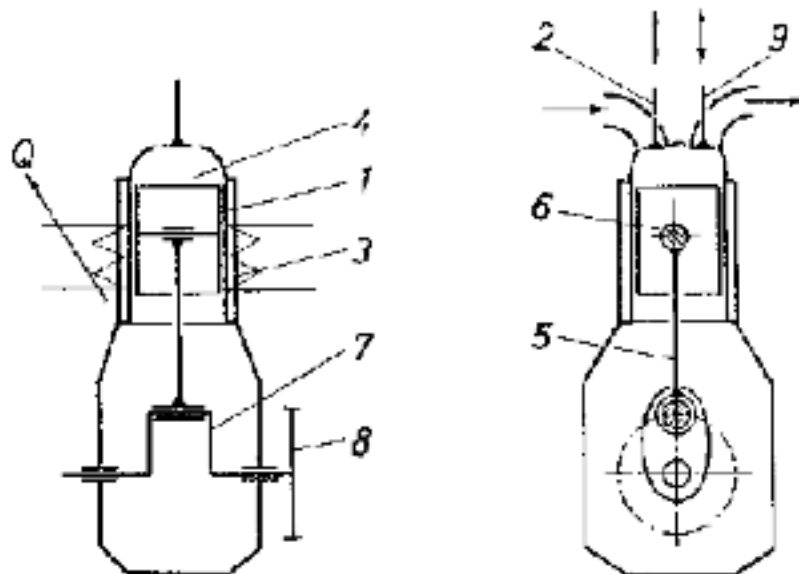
Principal scheme of a 4-stroke engine. 1 piston, 2 inlet valve, 3 cylinder, 4 combustion chamber, 5 connection rod, 6 gudgeon pin, 7 crankshaft, 8 flywheel, Q head rejected (cooling).
